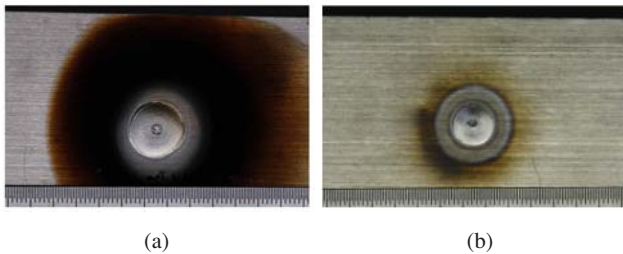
Surface appearances of SUS304 after stationary GTA welding for 20 seconds in (a) Helium and in (b) Argon
